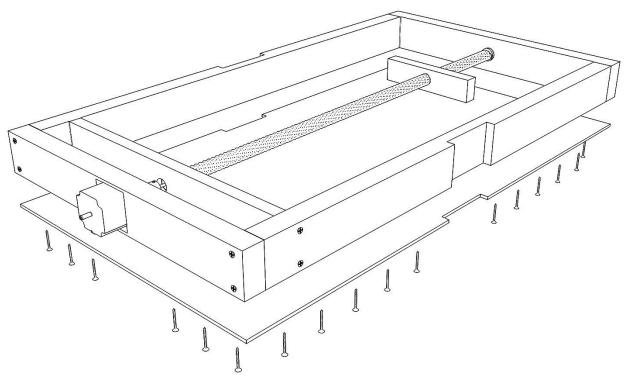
(ADDING THE BOTTOM FRAME COVER)
